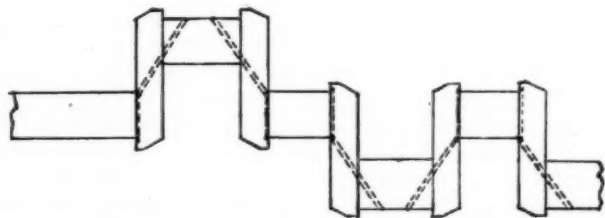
Section of crankshaft for four-cylinder motor, having five main bearings, and showing one method of drilling shaft to lubricate connecting rod bearings.
